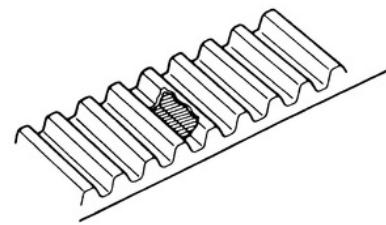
Inspect the timing belt for cracks, fraying, glazing or damage of any kind
